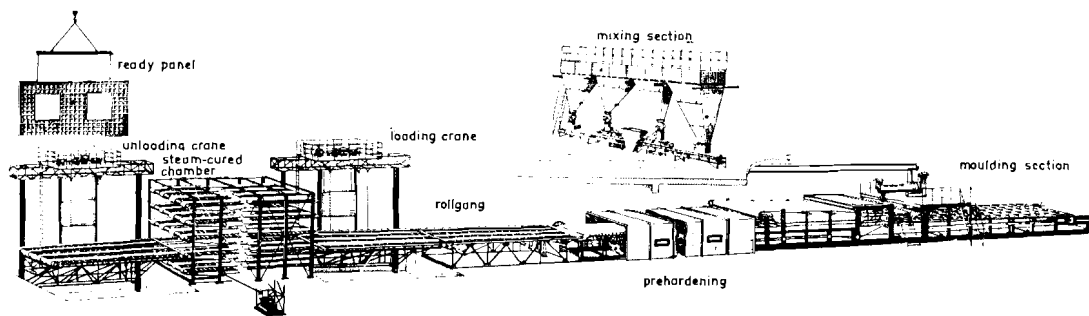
Production line scheme of the manufacture of rolled large-sized reinforced concrete wall panels.
